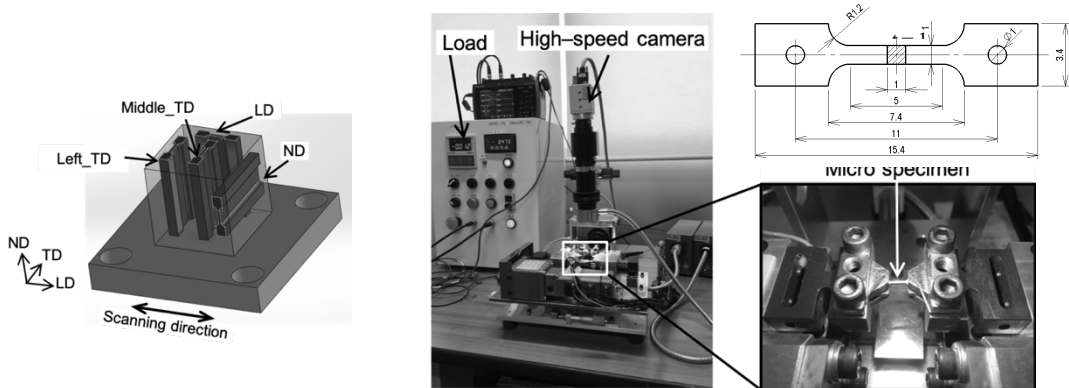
Micro tensile testing method; (left) location and direction of micro specimen for tensile test, (right) micro tensile test machine and specimen geometry
